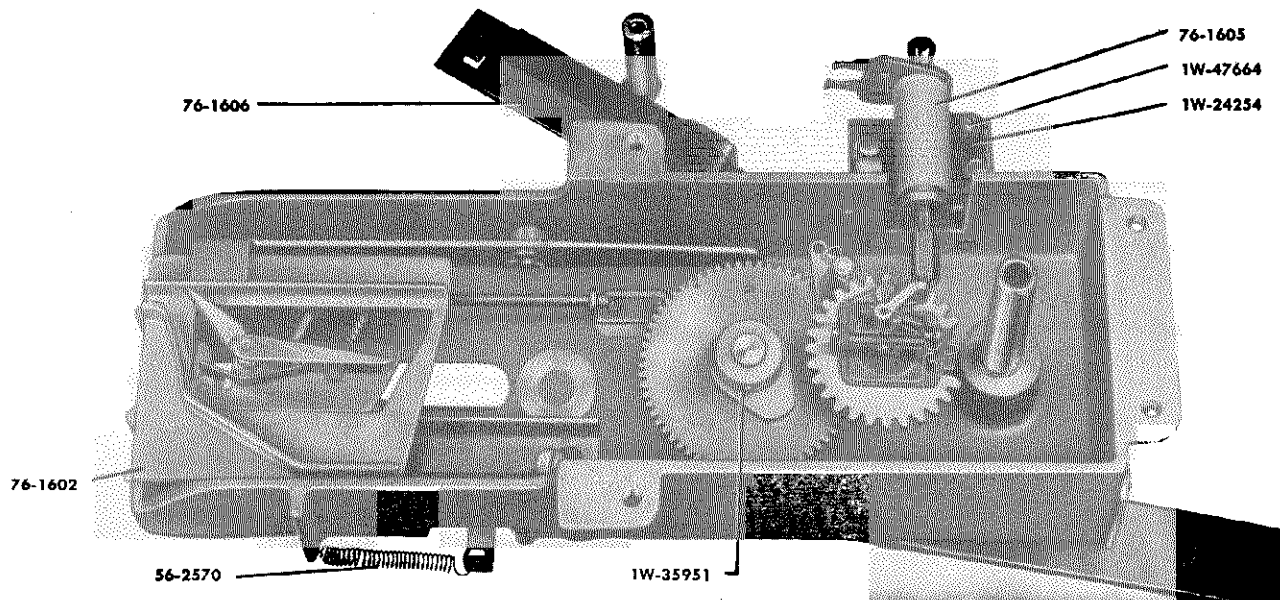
CHANGER MECHANISM ASSEMBLY, TOP VIEW.
